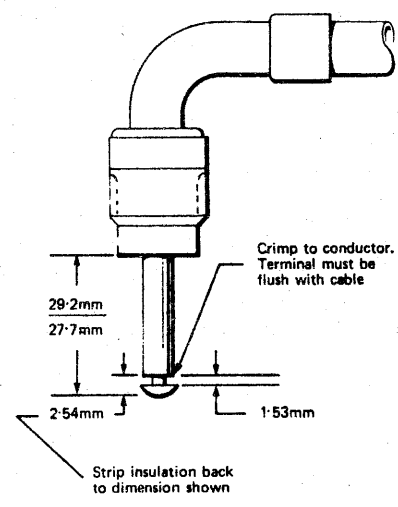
DETAILS OF TERMINAL CRIMP AT MAGNETO END OF IGNITION CABLE
